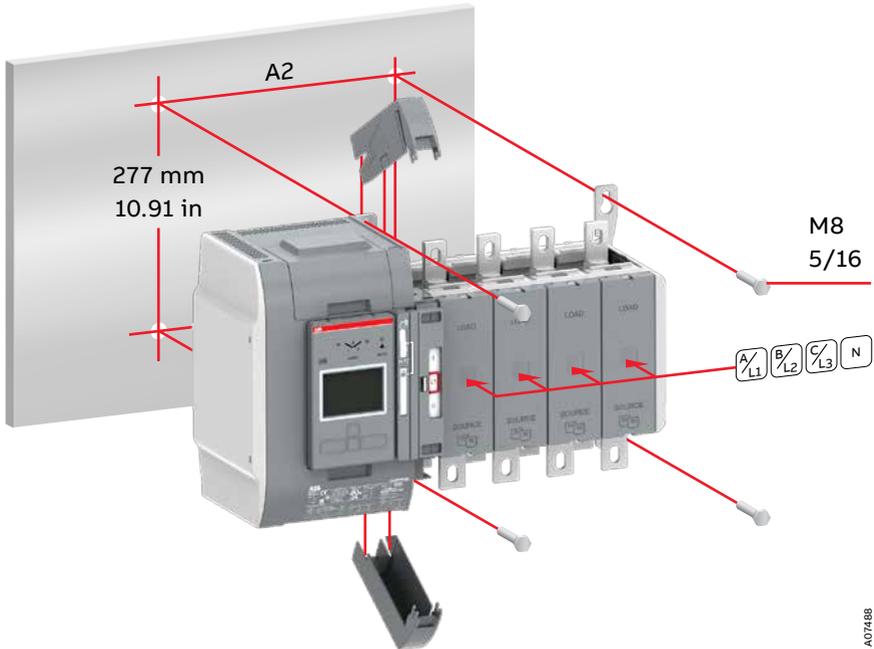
Automatic transfer switches, drilling hole distances / screw-mounting, [mm/in] and attachment of the self-adhesive labels
